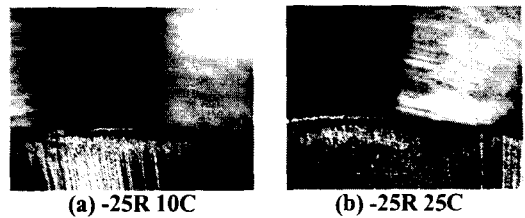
Illustration of Tool Wear in Ball EndMill $\phi 3$ with Different Tool Geometry
